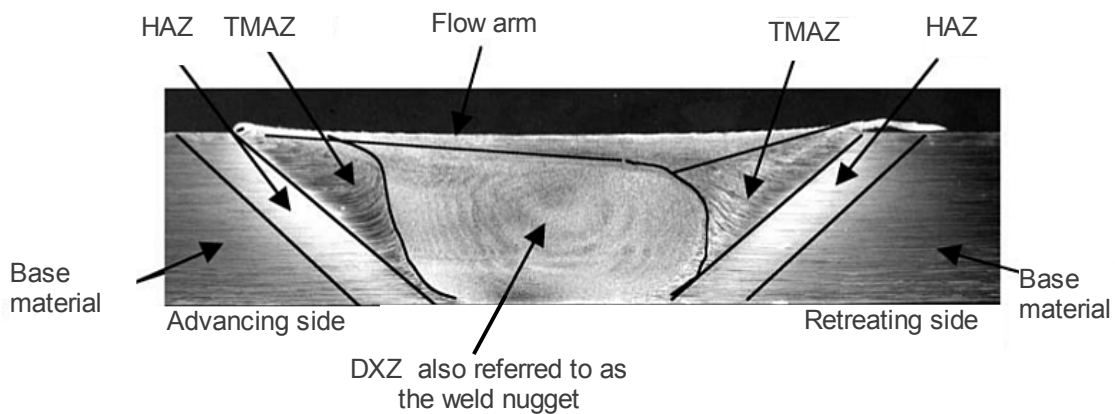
Macroscopic view of weld affected zones [32]
